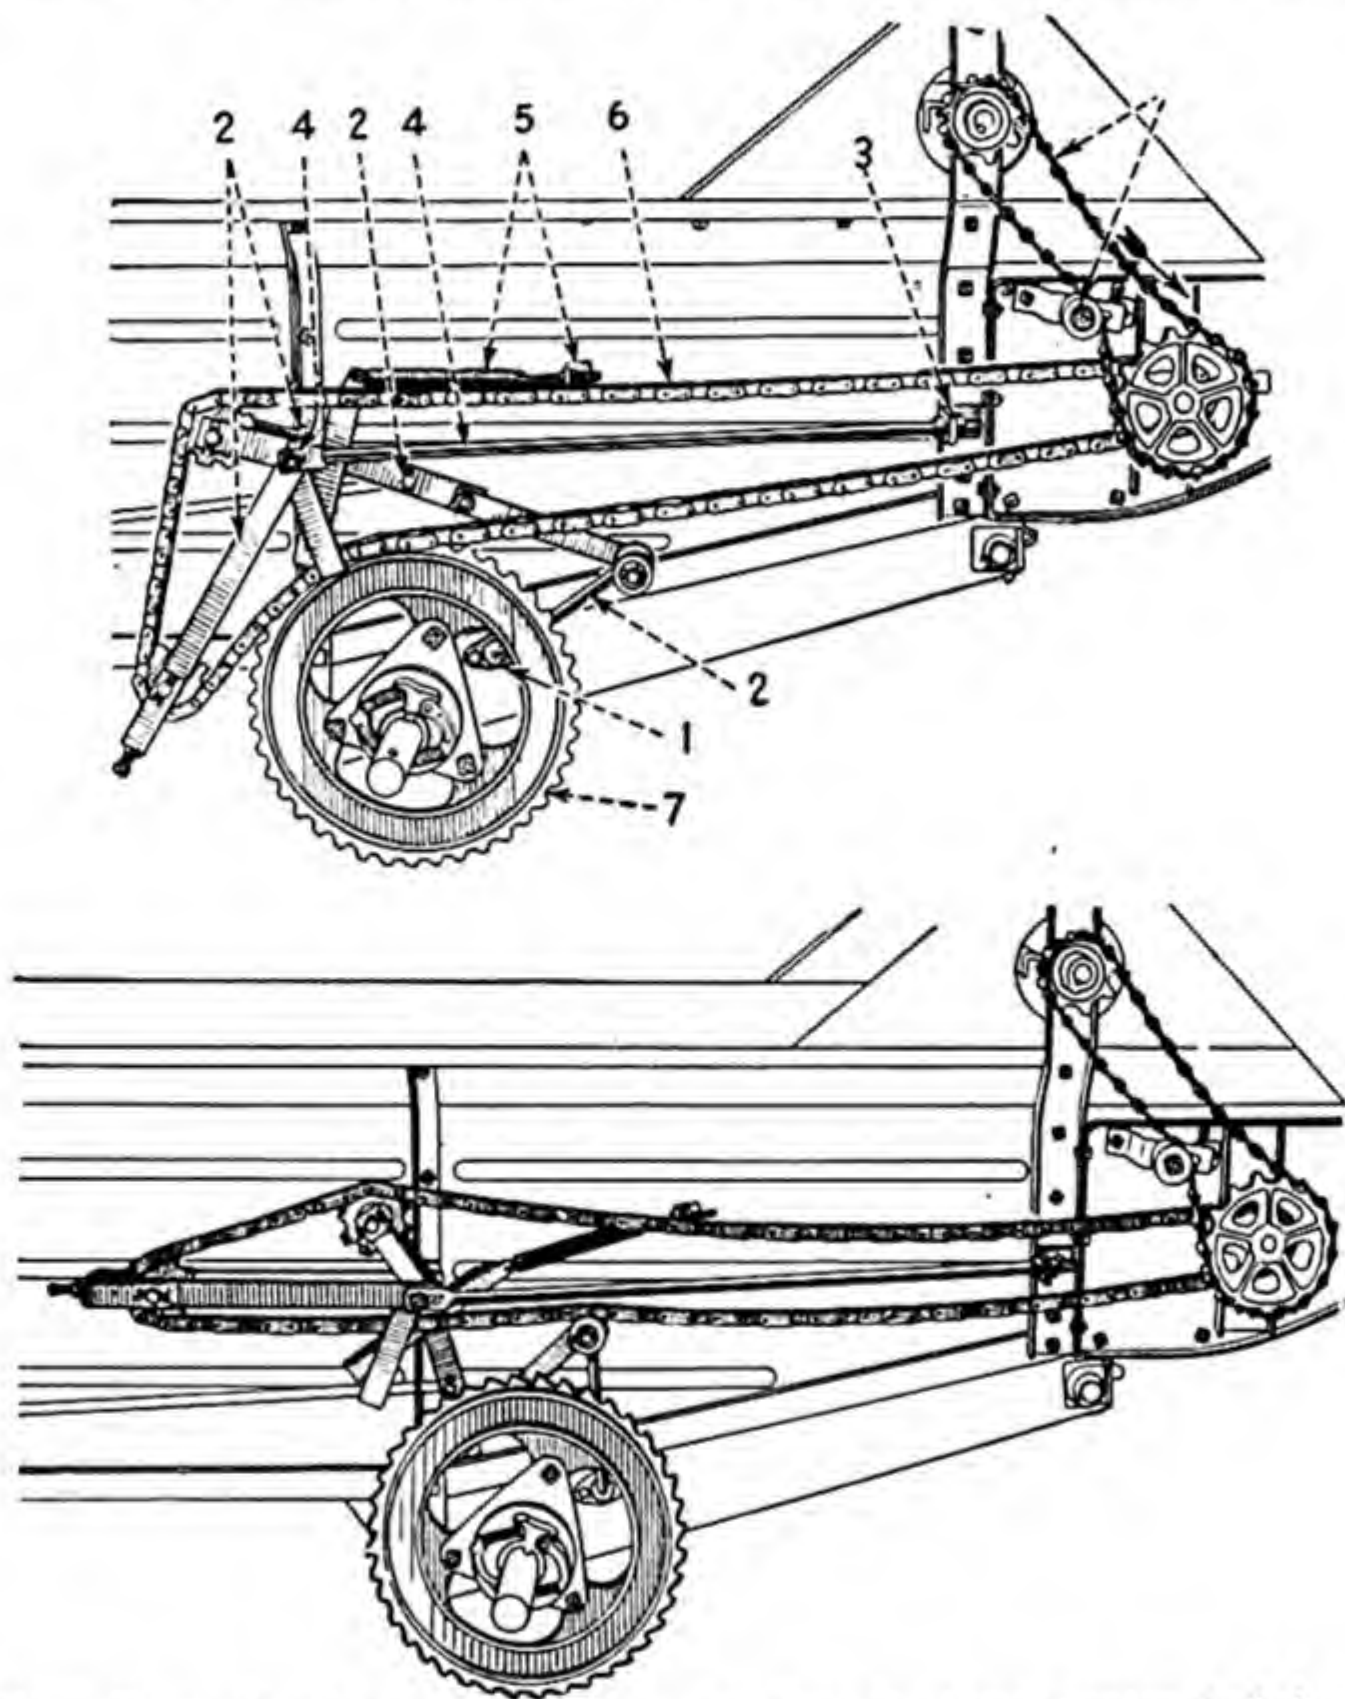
Power for the beaters is transmitted to the lower beater shaft by a chain in contact with the top of a sprocket on the main axle, *top*. The bottom view shows the chain in raised position, "out of gear."
